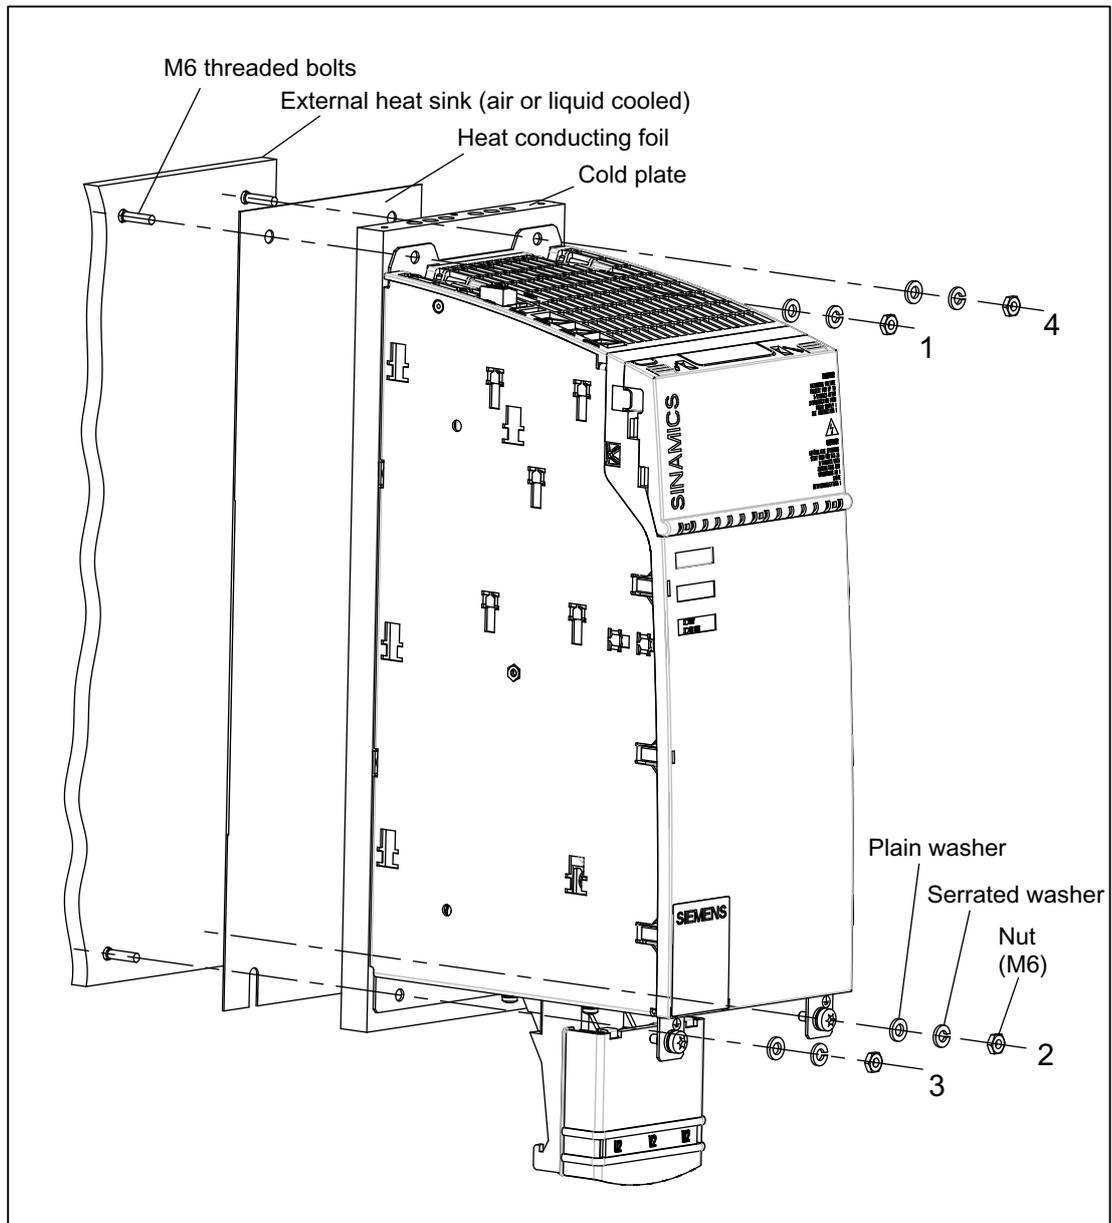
Installing a cold-plate power section with an external heat sink and heat-conducting film
